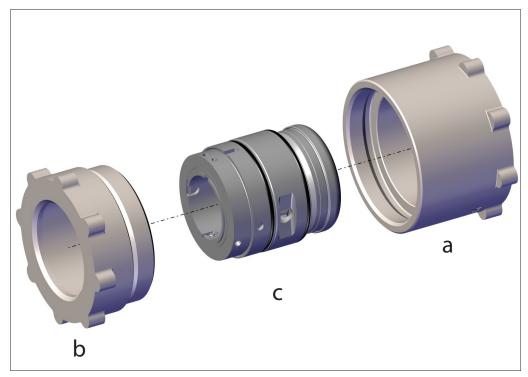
Inserting the mechanical seal cartridge correctly in the assembly aid a Lower tool section b Upper tool section
